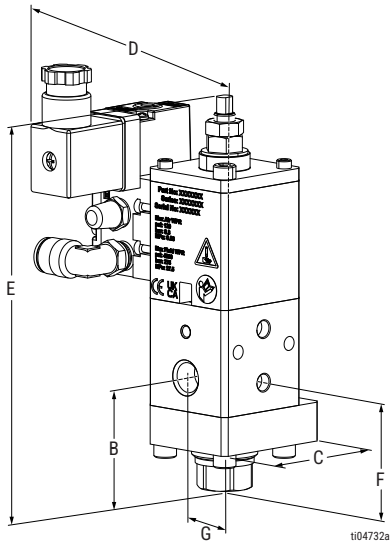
Dimensions for Snuff Back iQ Dispense Valve
